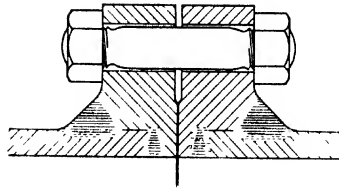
WELDED-ON FLANGE JOINT, TYPE "B"
